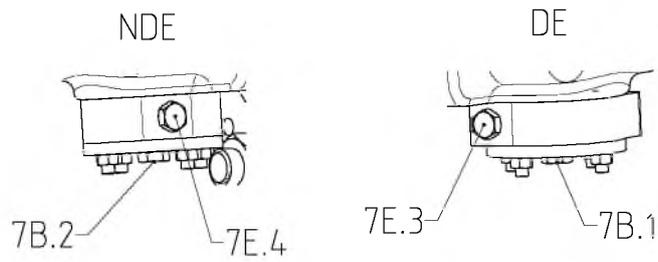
Bearing bracket connections - version with oil ring lubrication, view Y
